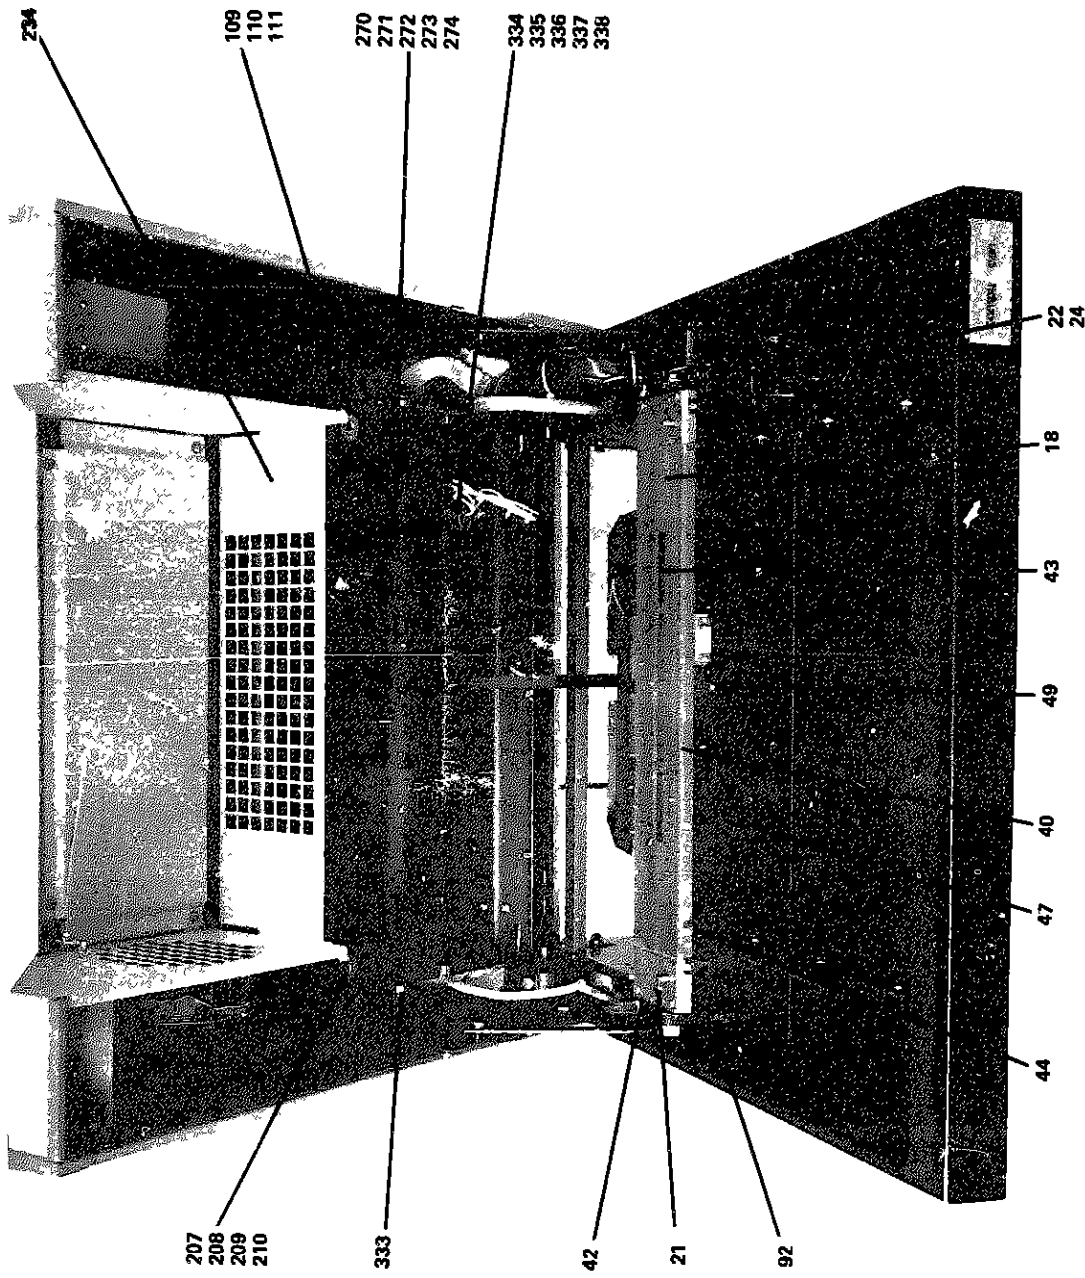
Read Head and Paper Drive Assembly Raised 1A7 (Sheet 1 of 8)
